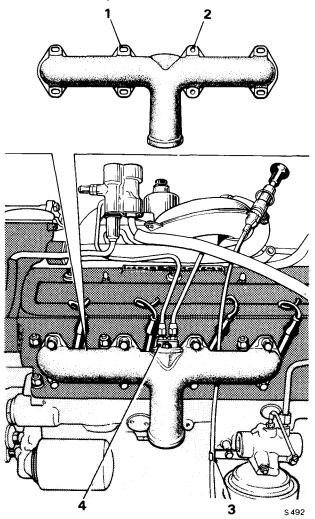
'B' BANK EXHAUST MANIFOLD WITH CENTRE OFF-TAKE
